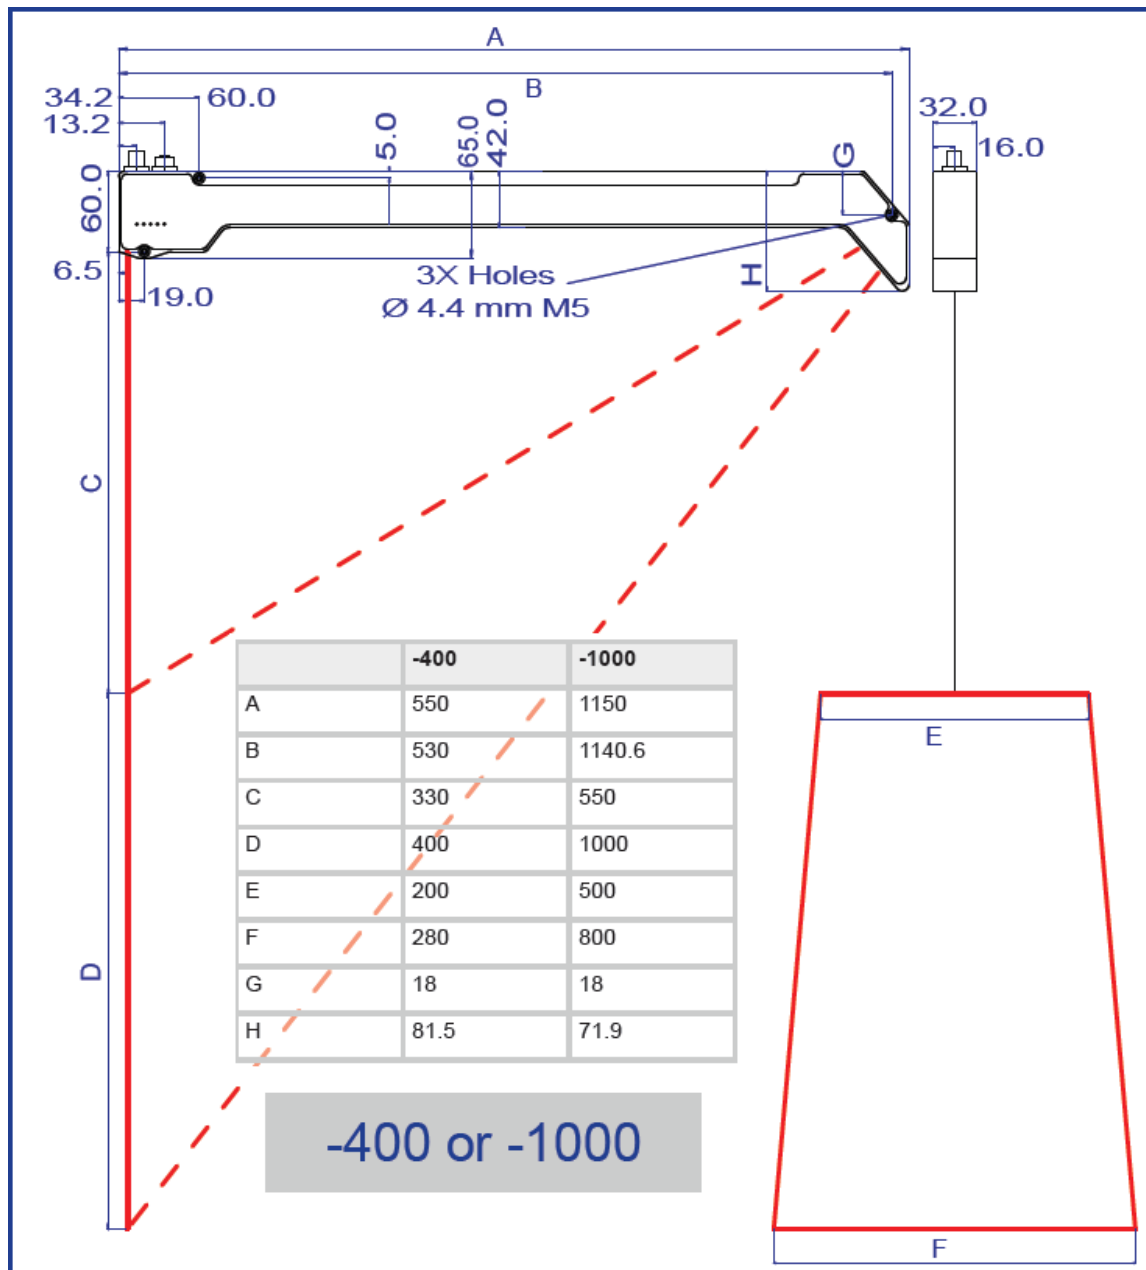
AP820-1000 laser scanner dimensions and schematic. The table lists dimensions for both the AP820-400 and AP820-1000 models. [36]
